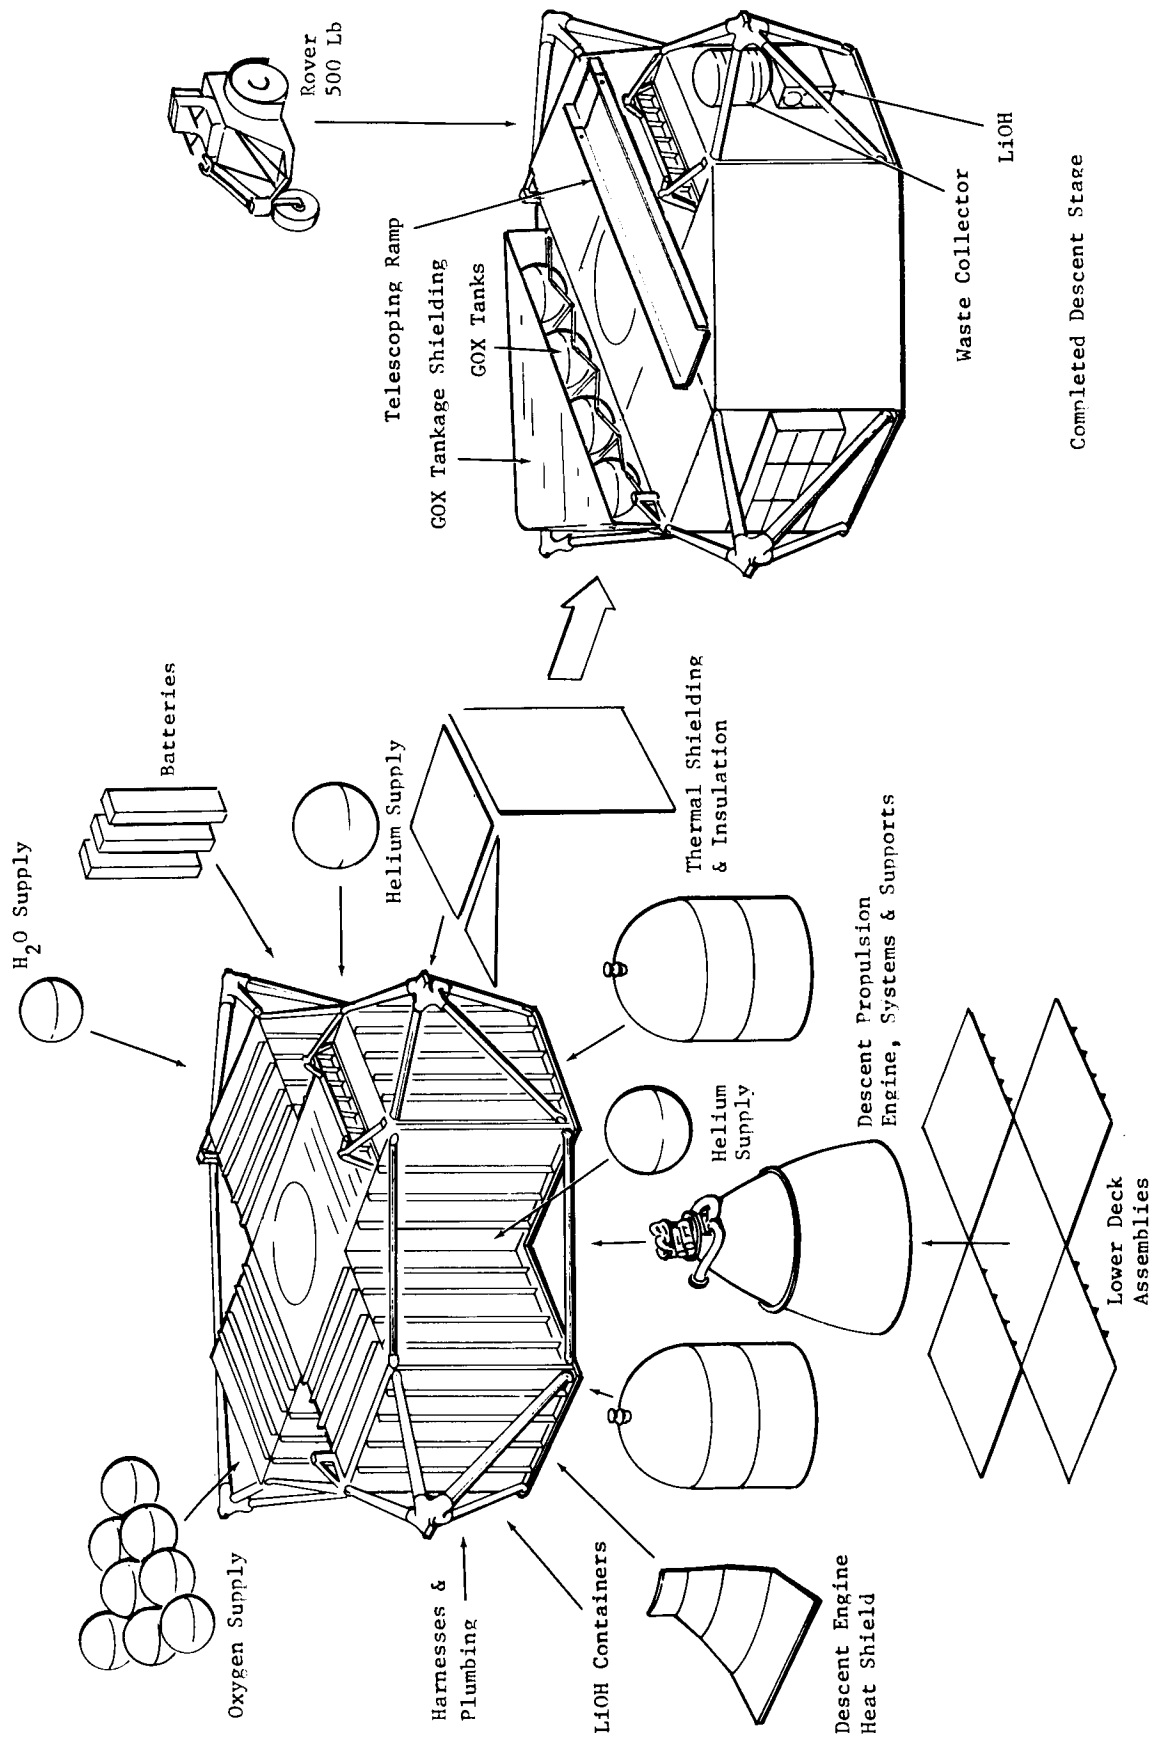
Final Assembly Flow - LEM Taxi Descent Stage (Config. 5)
